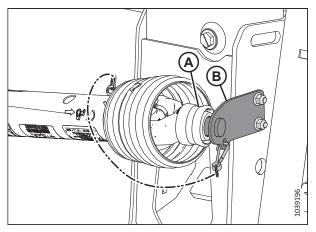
Driveline in Storage Position – Driveline B7038 or B7039
